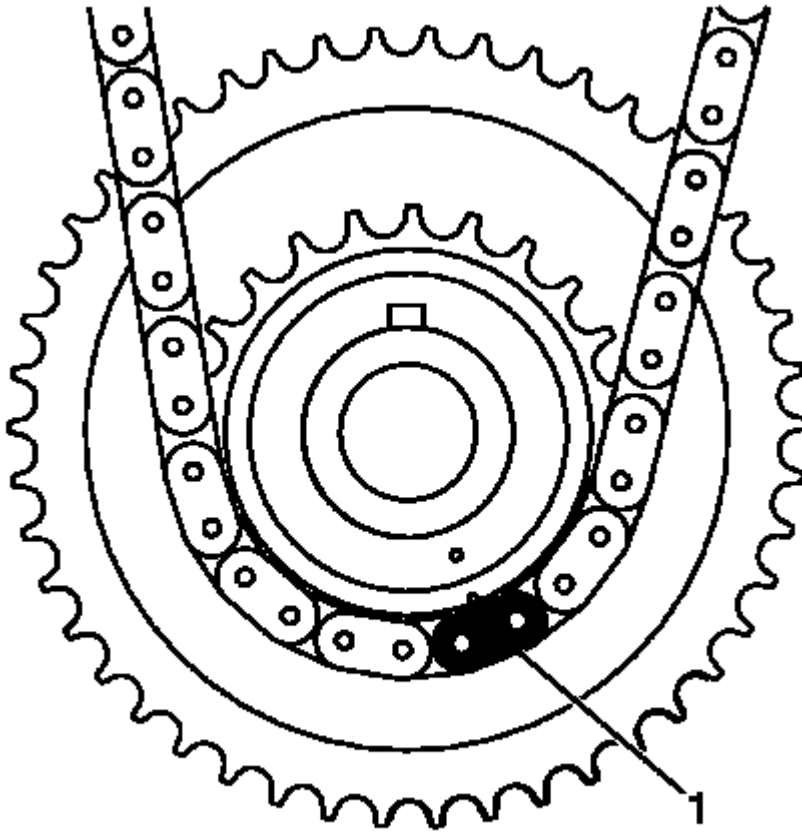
Identifying Timing Mark on Crankshaft Sprocket and Lining Up With First Matching Colored Link
